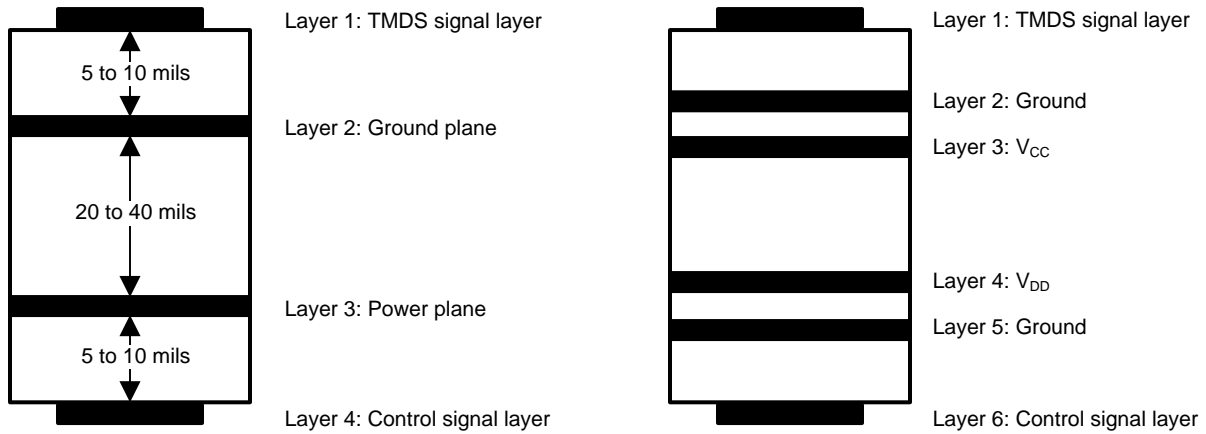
Recommended 4- or 6-Layer Stack for a Receiver PCB Design
